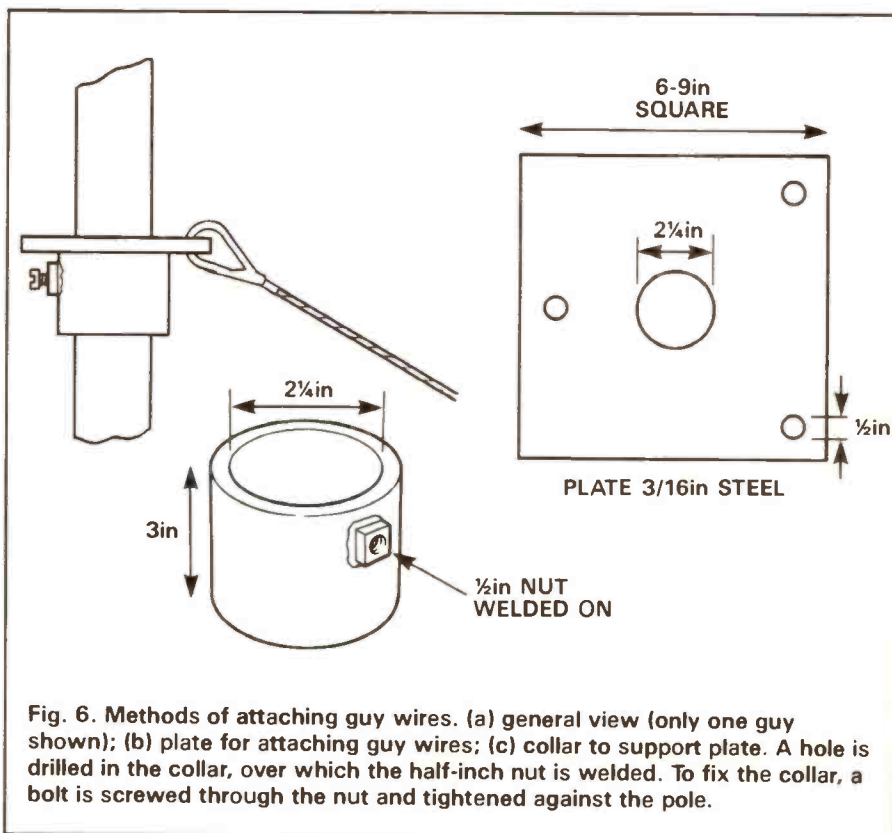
Methods of attaching guy wires. (a) general view (only one guy shown); (b) plate for attaching guy wires; (c) collar to support plate. A hole is drilled in the collar, over which the half-inch nut is welded. To fix the collar, a bolt is screwed through the nut and tightened against the pole.
